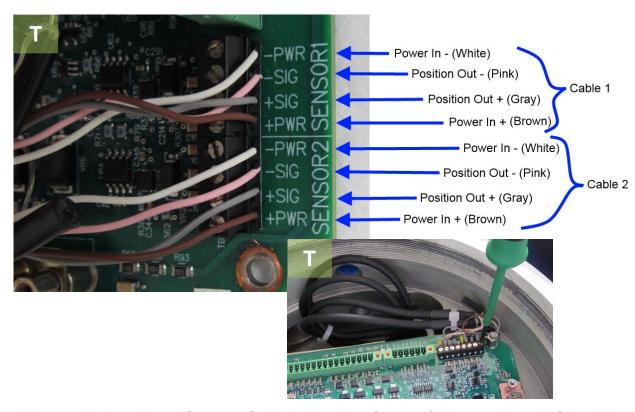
Install and Connect Cylinder Position Sensor Cables and Install Gland Nut
